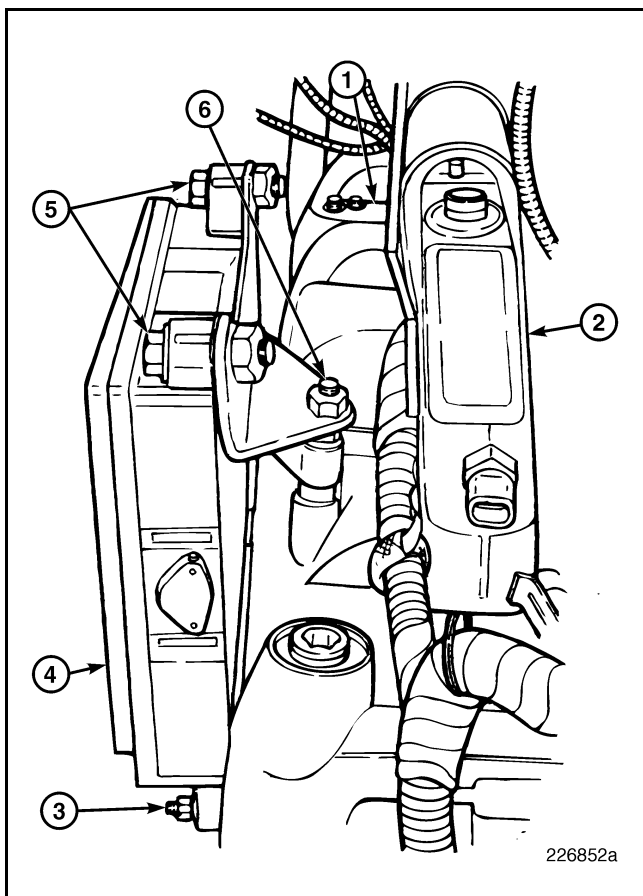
Engine ECU Installation (Left-Side Mounted Unit)
